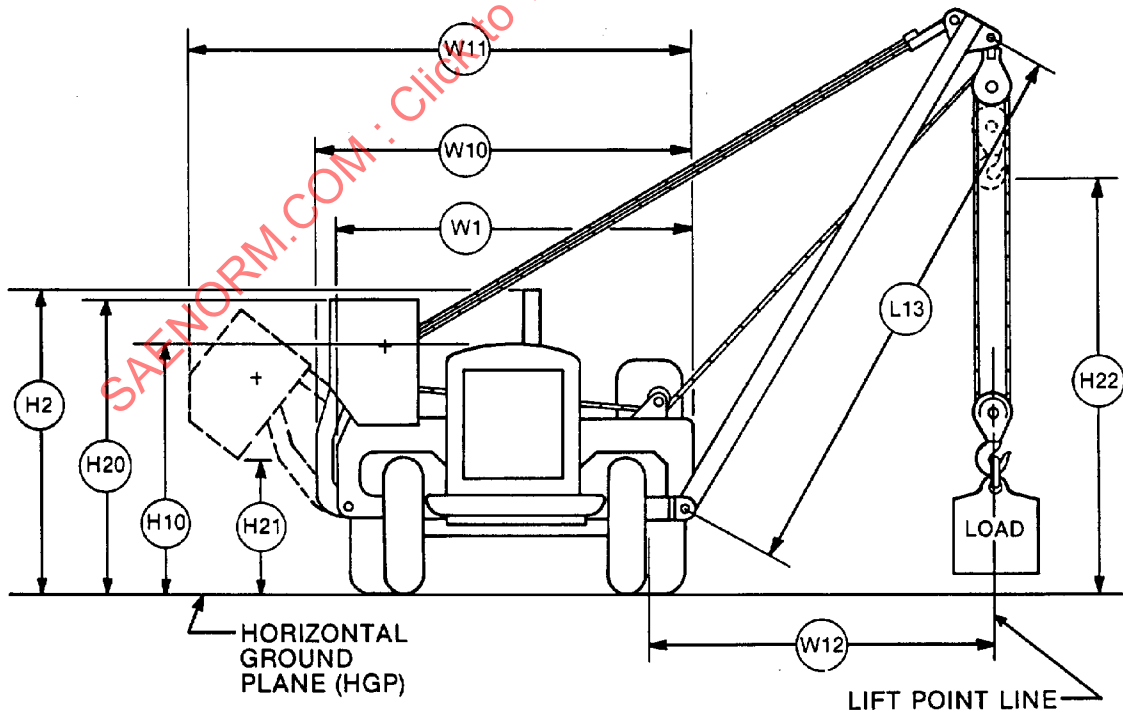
WHEEL MACHINE STEERED STRAIGHT
